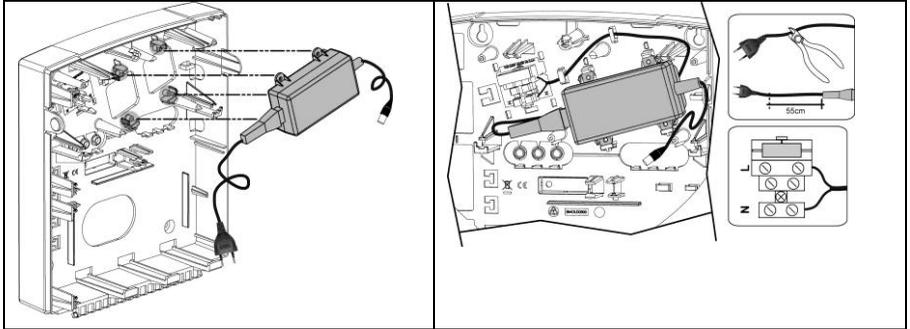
Placing the AC adapter w and w/o mains fuse
